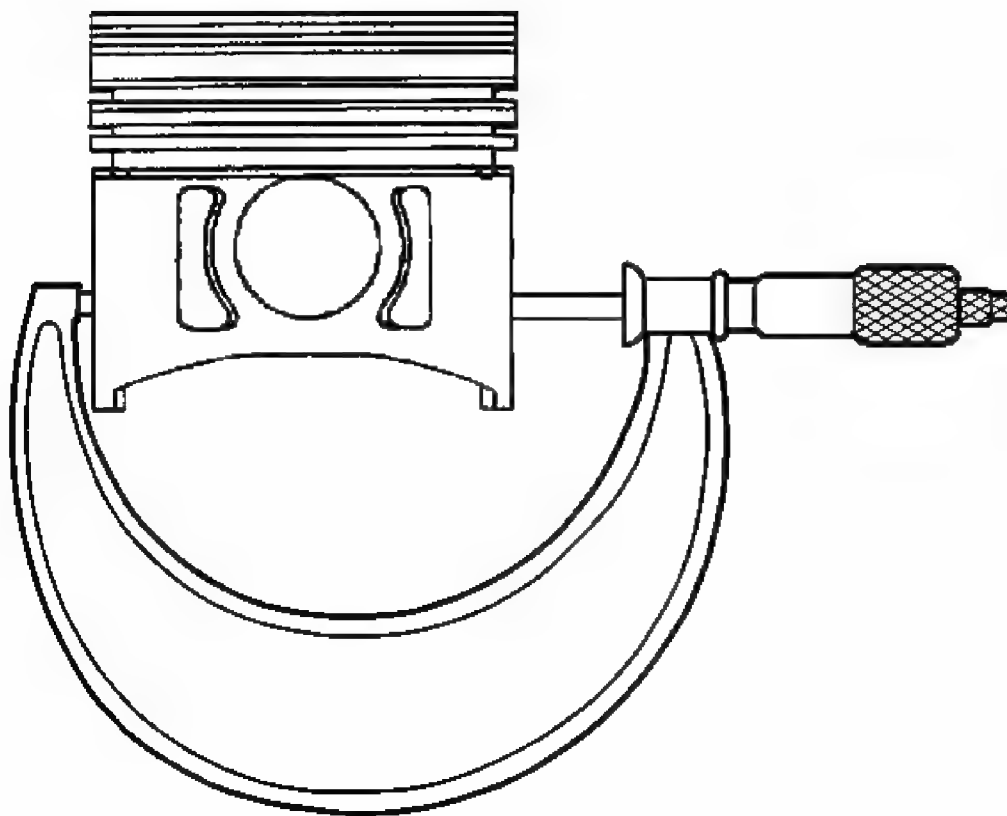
Measuring Piston Outside Diameter Using Micrometer
